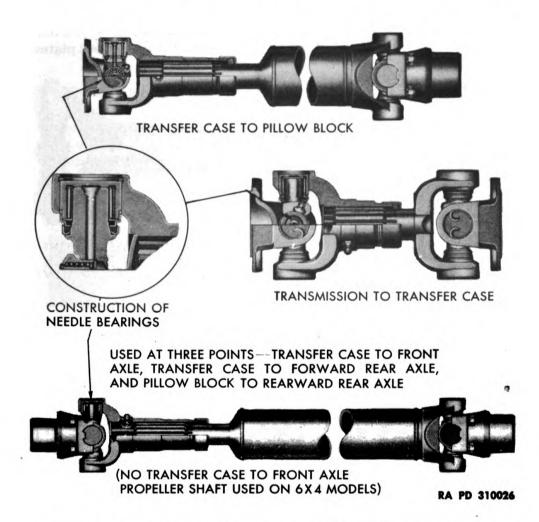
Spicer Type Propeller Shafts and Universal Joints
